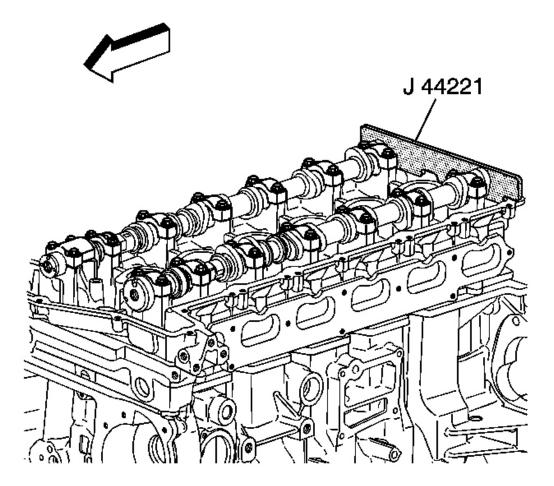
View Of J 44221 Installed To Camshafts Courtesy of GENERAL MOTORS CORP.
